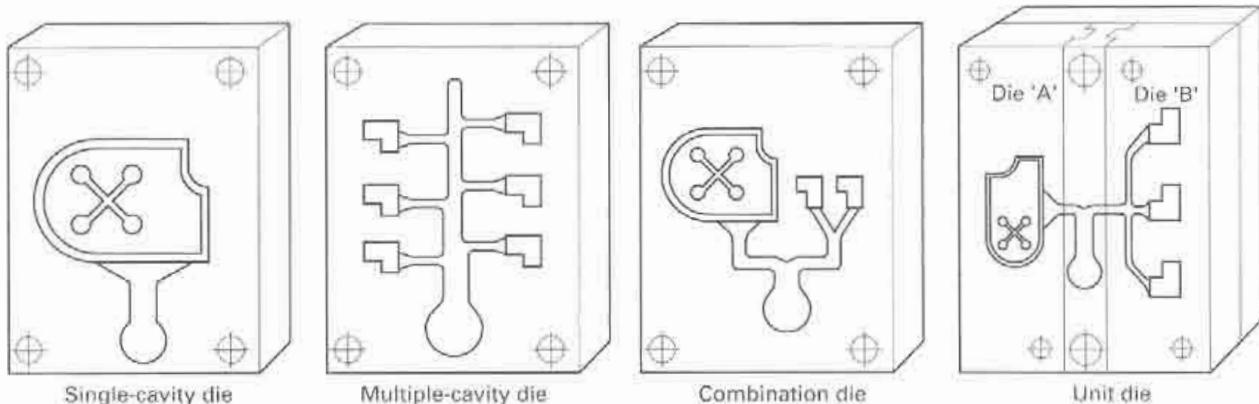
Various types of die-casting dies. (Courtesy of American Die Casting Institute, Inc., Des Plaines, IL.)
